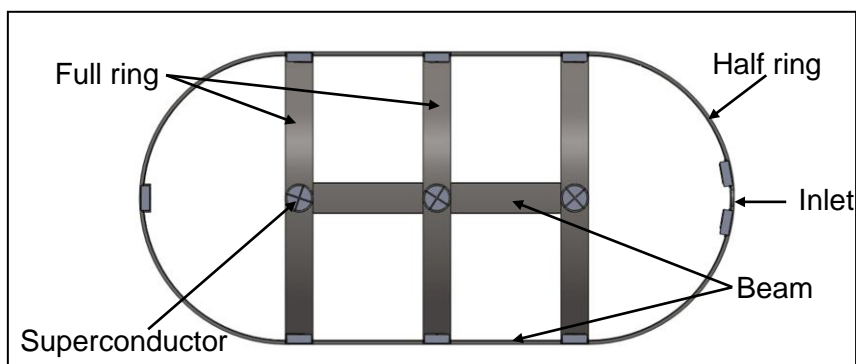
Right sectioned view of the CAD model of the inner vessel support frame which holds superconductors.
